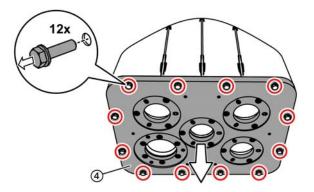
Removing the cover of the transformer housing and the sealing ring
